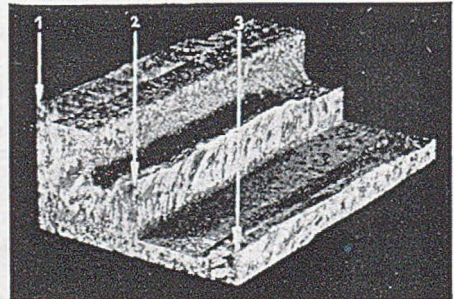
Special step-form casting in unalloyed aluminium, after laying on by arc welding, of three deposits of metal.
